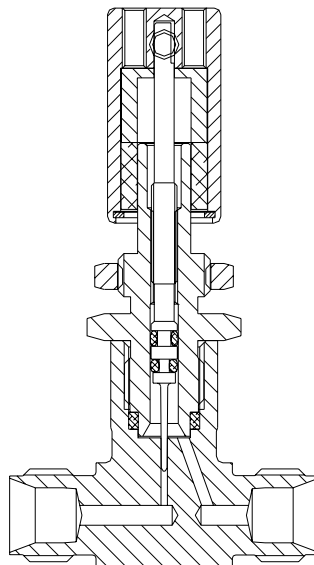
NS Series Metering Valve with Precision Adjustment Handle Cross Sectional View
